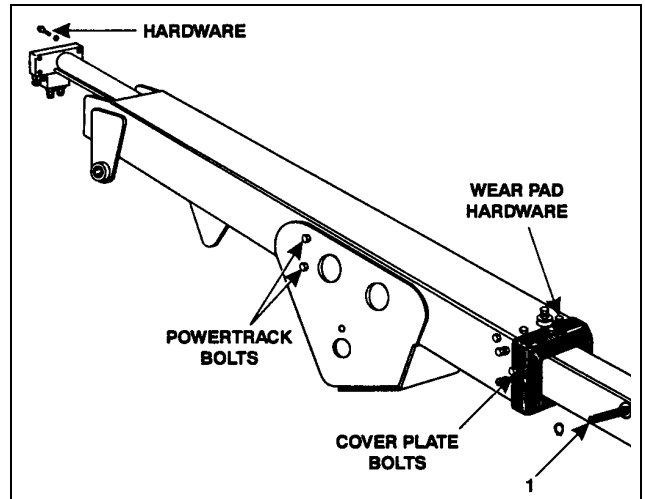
Location of Components - Removal of Telescope Cylinder.
